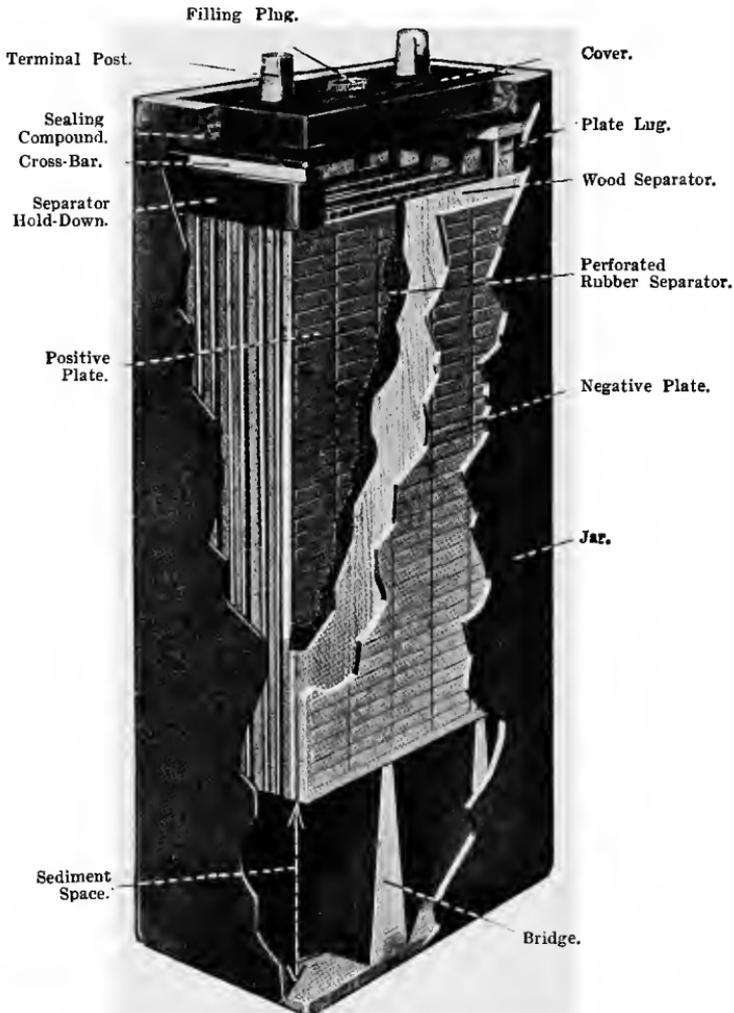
Assembly of Cell Showing Wood and Rubber Separators Installed.
